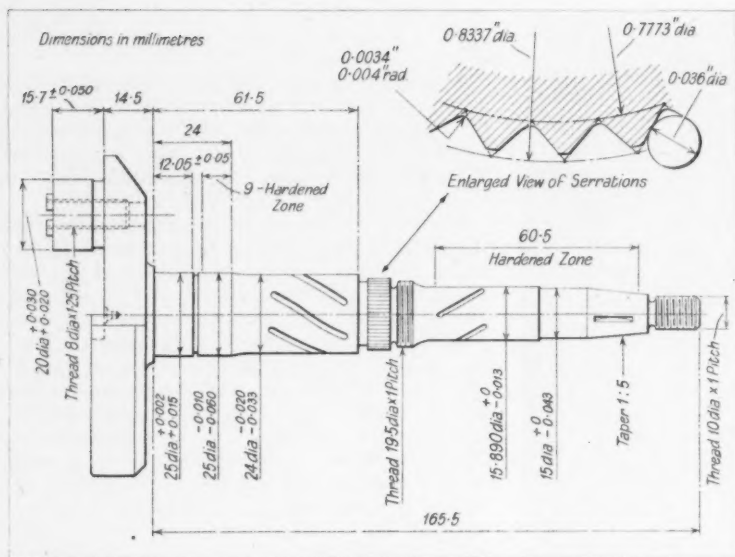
A View of the Crankshaft, Showing the Principal Dimensions
